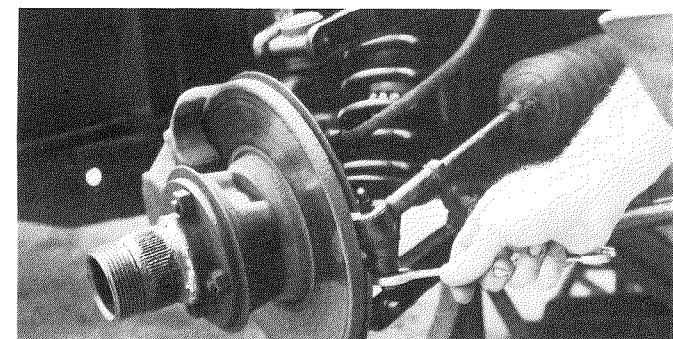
First job as might be expected is to jack up the front end of the car, remove the road wheels and set the car firmly on axle stands. The job proper starts by undoing the track rod end bottom nut...
